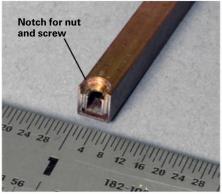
A homemade fix. To hold the nut that secures the truck screw from inside the tender, Peter made this tool. The end is notched to hold the nut and provide clearance for the screw.
